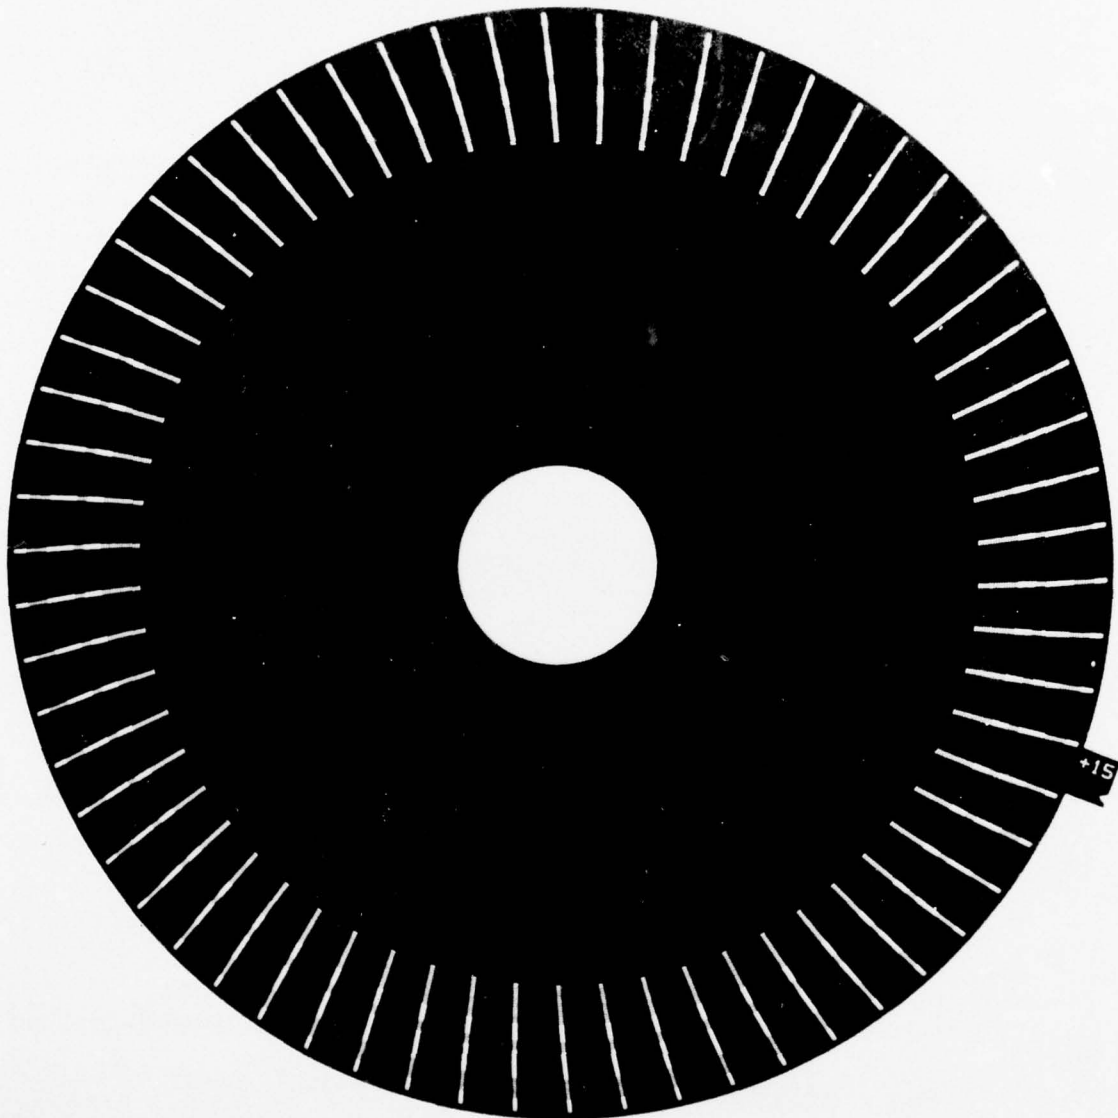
Completed Final Wheel Blank Laminate Showing Cooling Passages.
